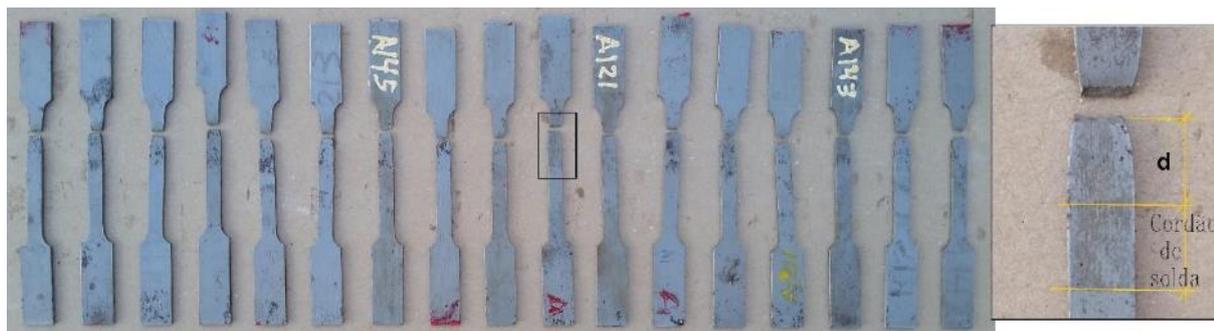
Breakage of specimens in the tensile test weld
